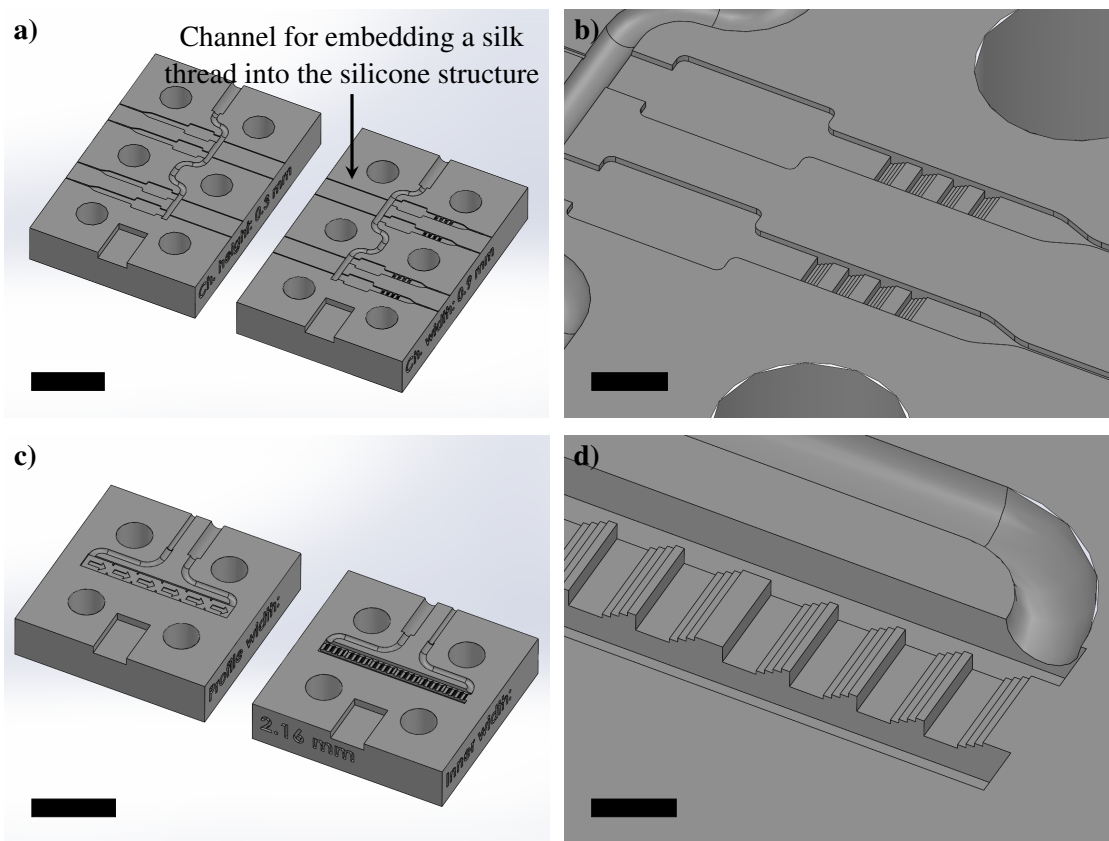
CAD drawing of the molds which were used to fabricate the closing mechanism out of PDMS. a) The mold for the belt part. Scale bar is 10 mm. b) Zoomed view on right mold half in a. Scale bar is 2 mm. c) The mold for the U-profile. Scale bar is 10 mm. d) Zoomed view on the right mold in c. Scale bar is 1 mm.
